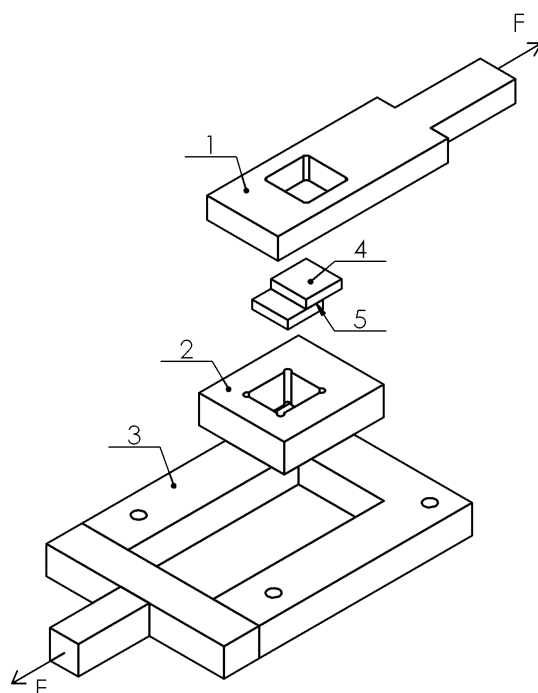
Testing assembly; 1-shearing tool, 2-adapter for small specimens, 3-holding block, 4-specimen, 5-bond line (according to EN ISO 13445)
